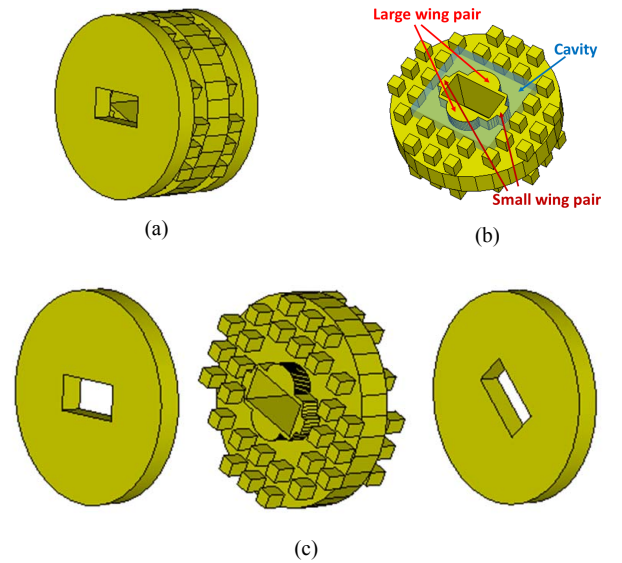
Geometry of the one-step 45° double-wing gap waveguide twist: (a) the assembly set; (b) pin flange section with cavity; (c) separate view of the one-step twist.
